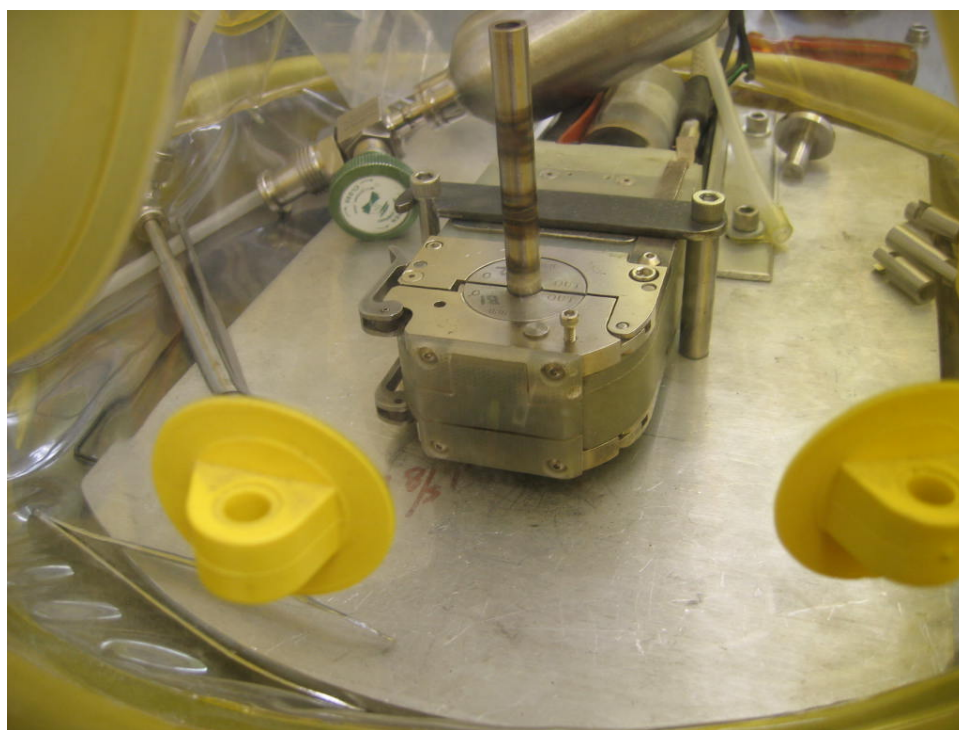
Orbital welding system for capsule closure inside a He glove bag with a test tube shown in place.
